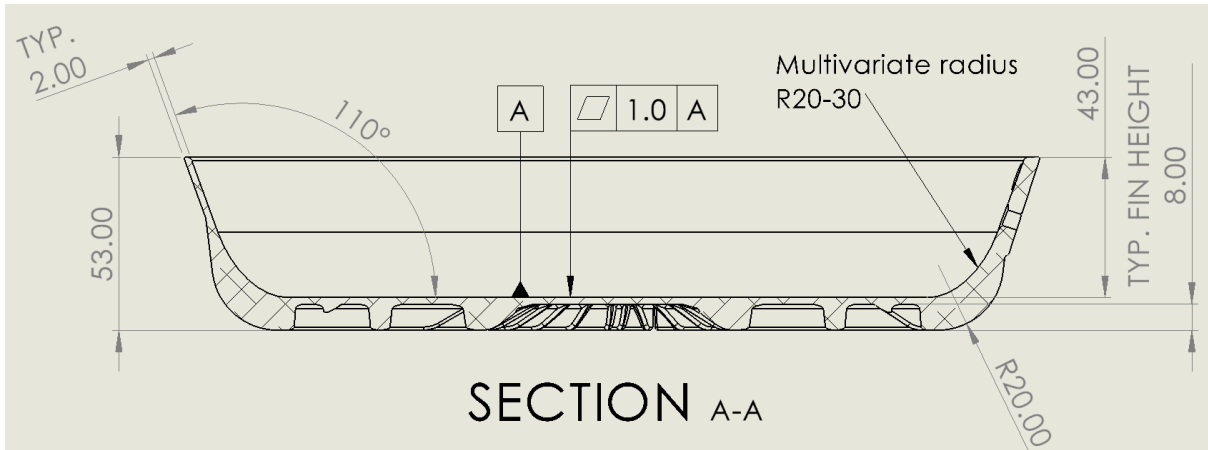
technical drawing of section of the pan. Frying surface specifications.
